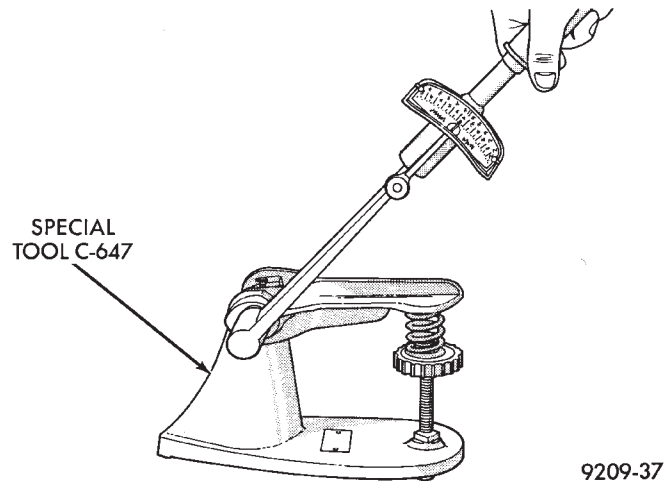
Testing Valve Spring for Compressed Length with Tool C-647
